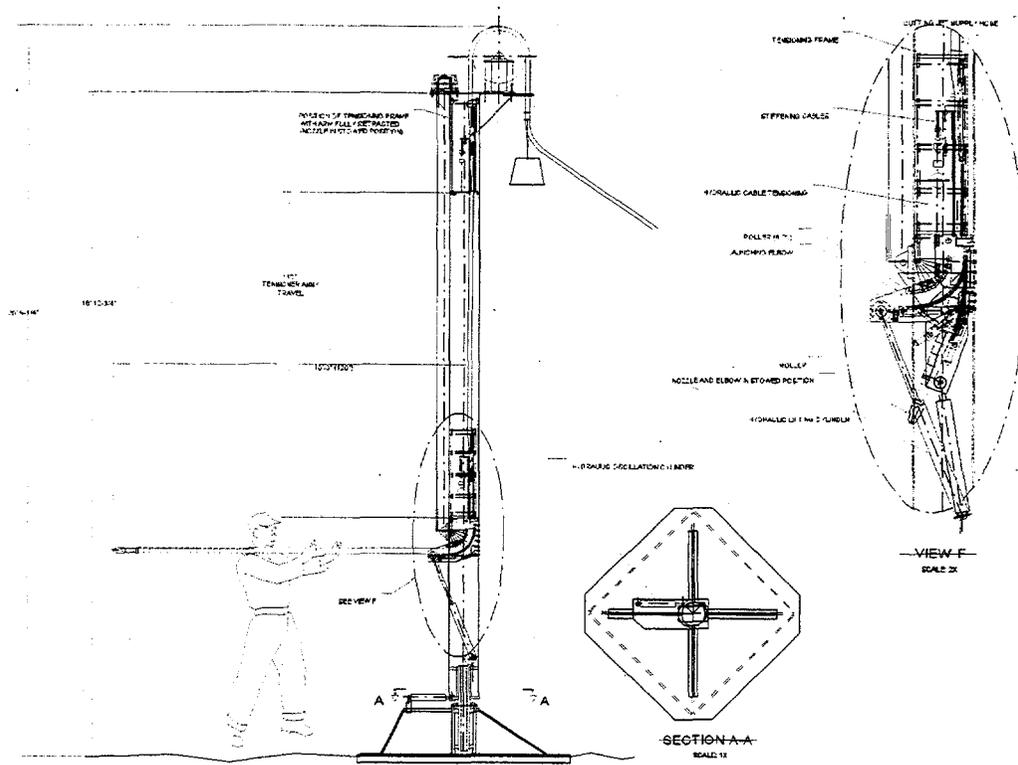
Details of Extensible-Nozzle Prototype Floor-Mounted Test Stand
